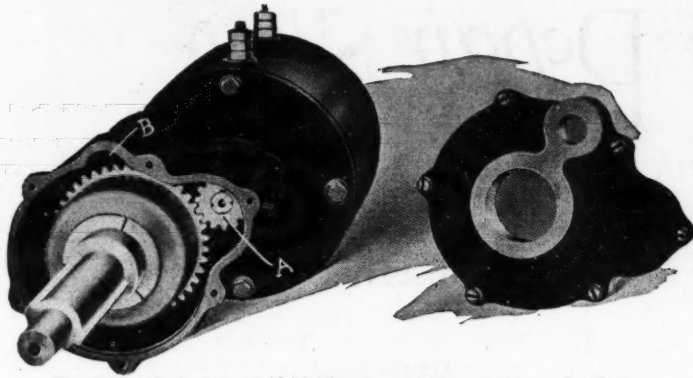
End view of 1914 Wagner starting motor and reduction gearing
